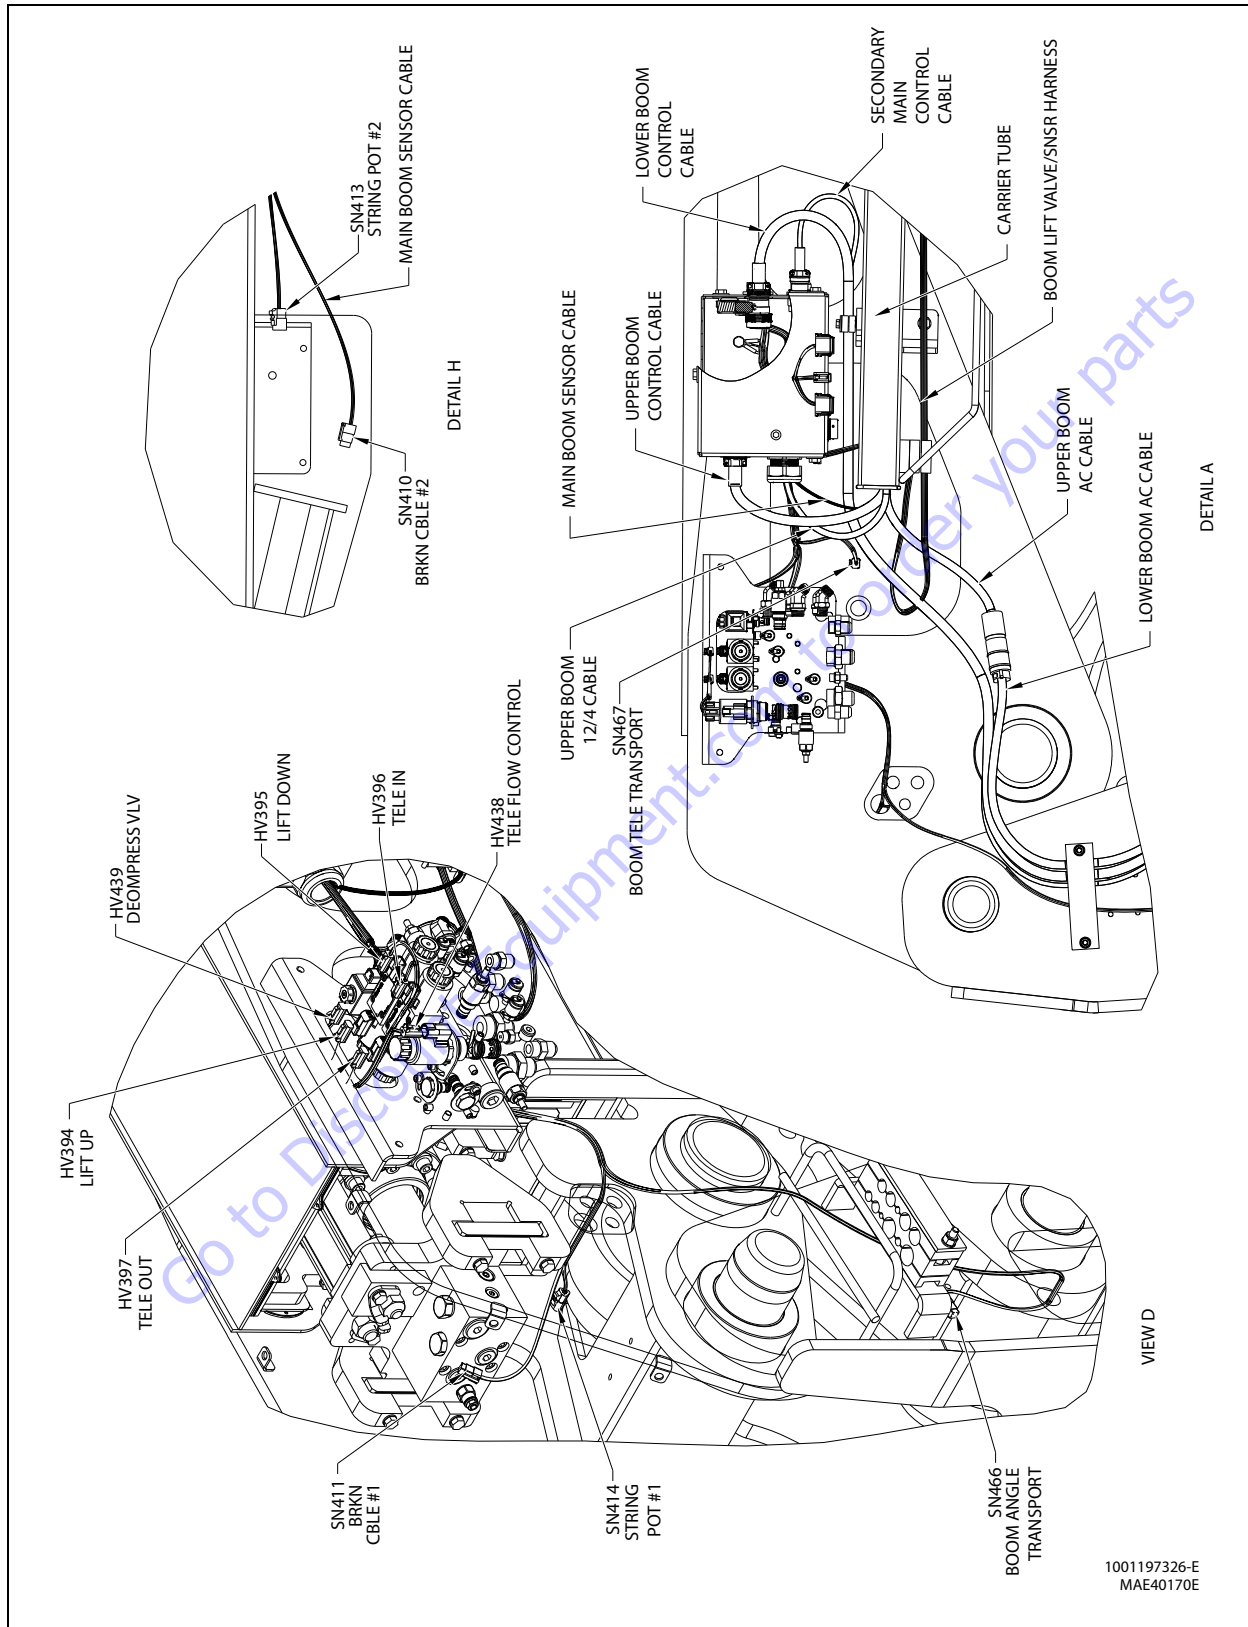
Boom Electrical Installation (ANSI) - Sheet 3 of 5
